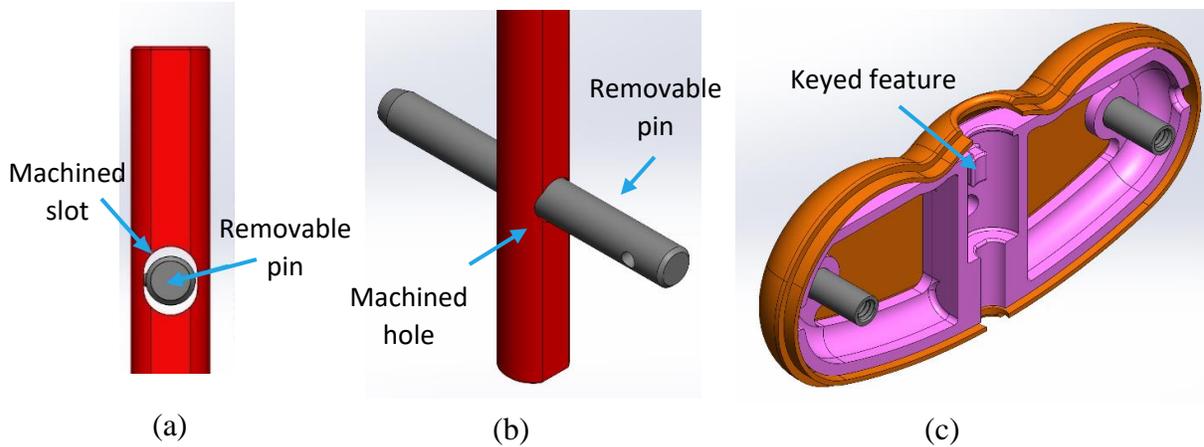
SolidWorks rendering of the central steel shaft slot with pin (a), central shaft hole with pin (b), and keyed feature of the steel inner handle structure (c).
